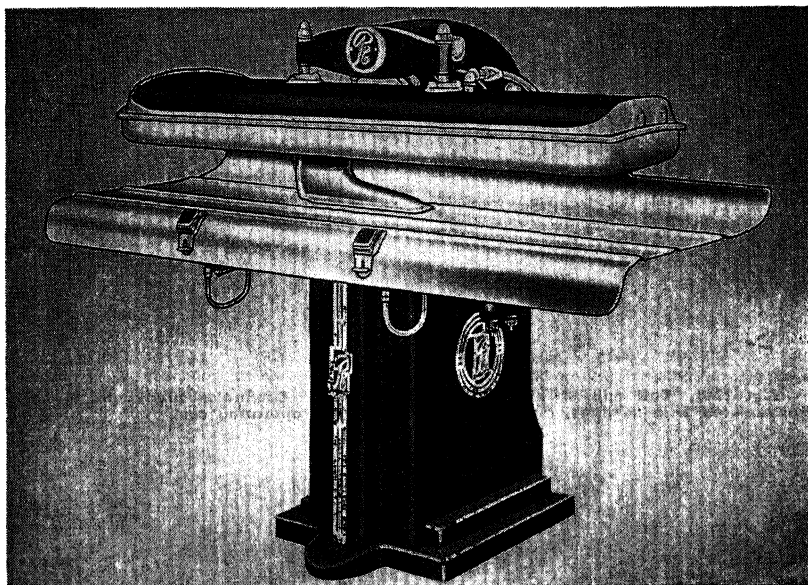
Laundry pressing machine. Redesign of frame of machine from bulky casting to welded steel construction cut weight 300 lbs. and effected savings of 16% in floor space. Increased rigidity of welded frame permits greater operating pressures for 40% greater laundry production. See Fig. 468.
